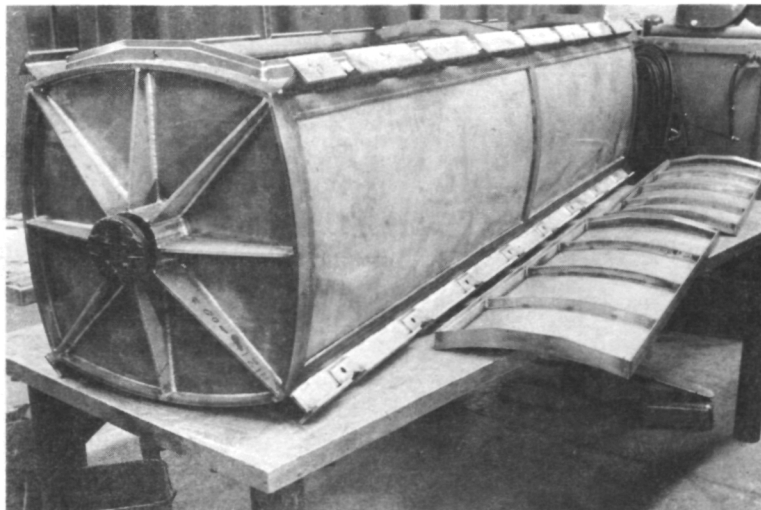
Fabricated tank just before welding on covers for hydrostatic test.
